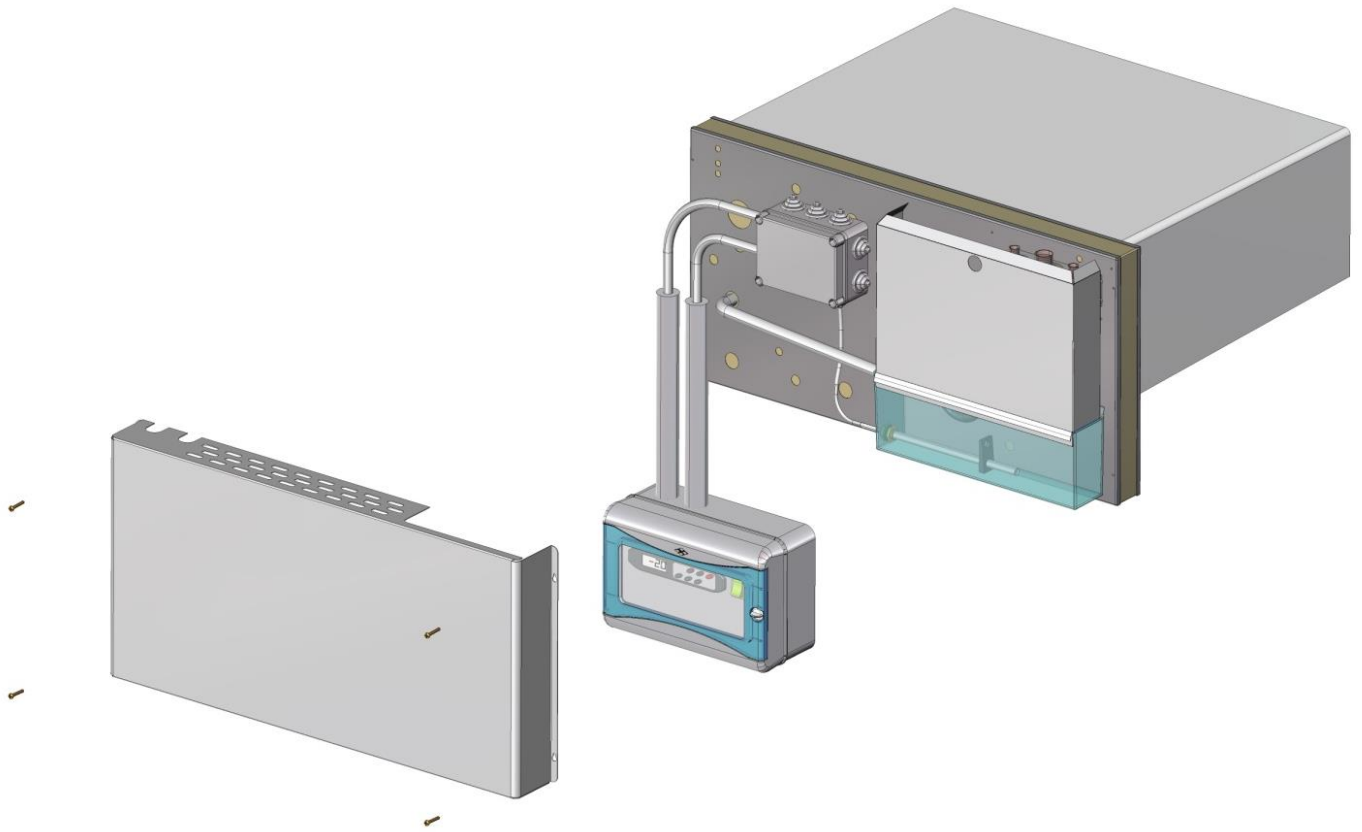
ASSEMBLY OF EVAPORATOR .....	14
